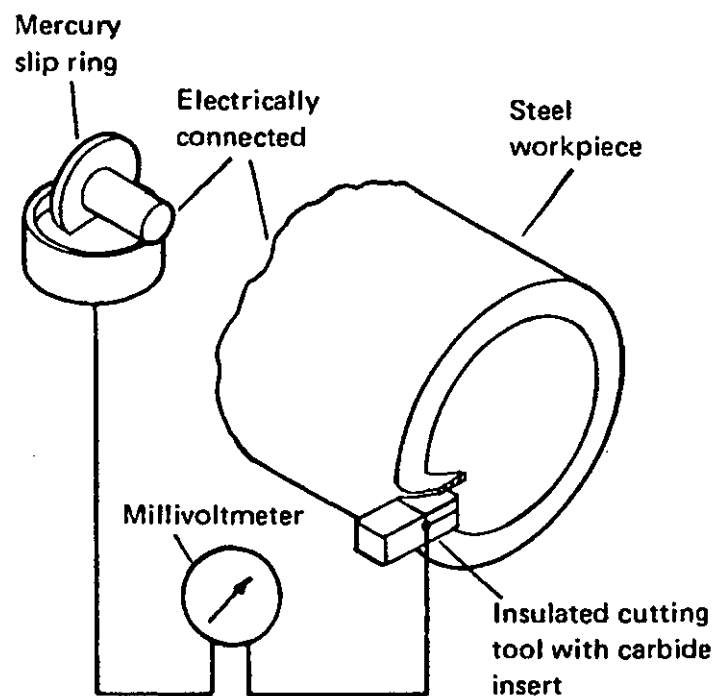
Tool-workpiece thermocouple circuit (from [3])
